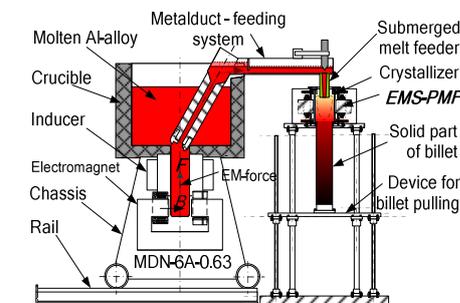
Scheme of 7075-alloy casting from magneto-dynamic installation to the semi-continuous 3~10" billet casting machine
